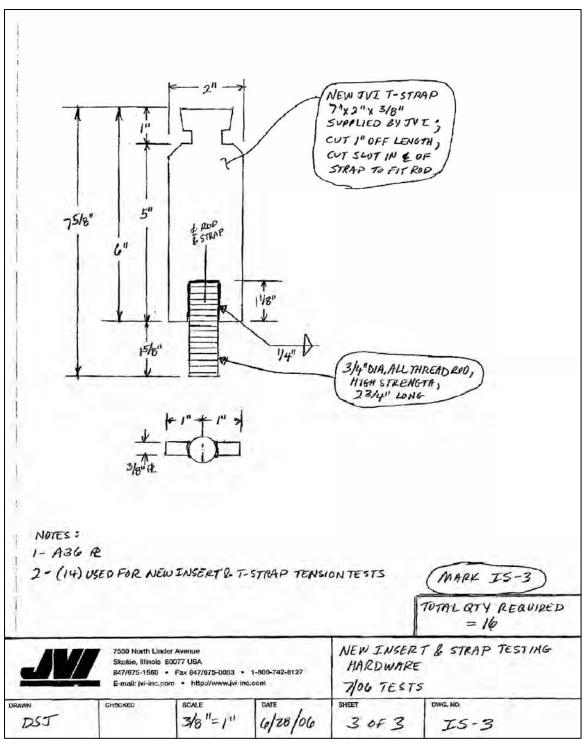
T-notch strap with modification to accept tension rod for pullout tests.
